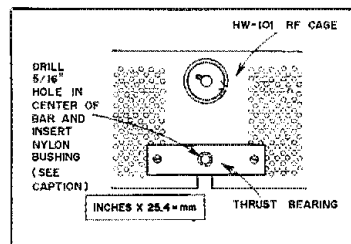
This thrust-bearing assembly reduces excessive wear on the loading-capacitor bearing in an HW-101. After placing the thrust-bearing assembly over the rotor shaft, mark mounting holes A and B to align with holes in the rear of the rf cage. Drill A and B with a 1/8-inch bit. Mount the assembly on the rf cage with no. 6 hardware.
